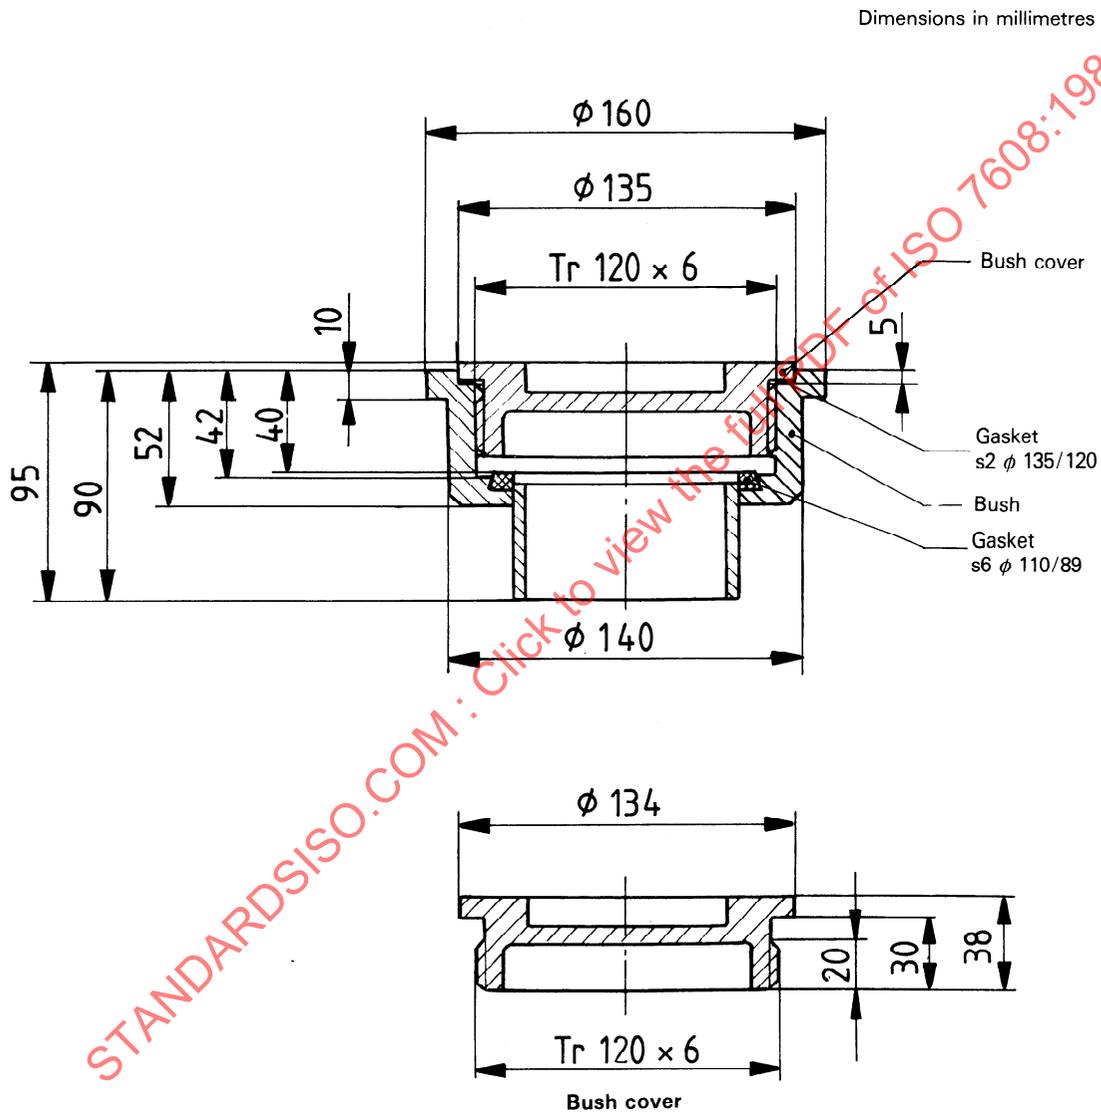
Bush DN 80 for the disposal of oily mixture, assembled with the cover
